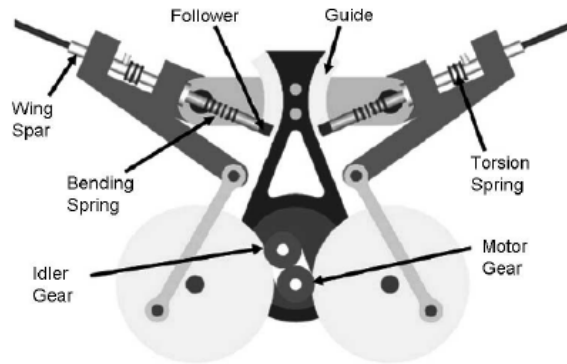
The front view of the ornithopter, showing the four-bar mechanism which drives the wings. The motor gear drives both the right gear wheel and idler gear.
